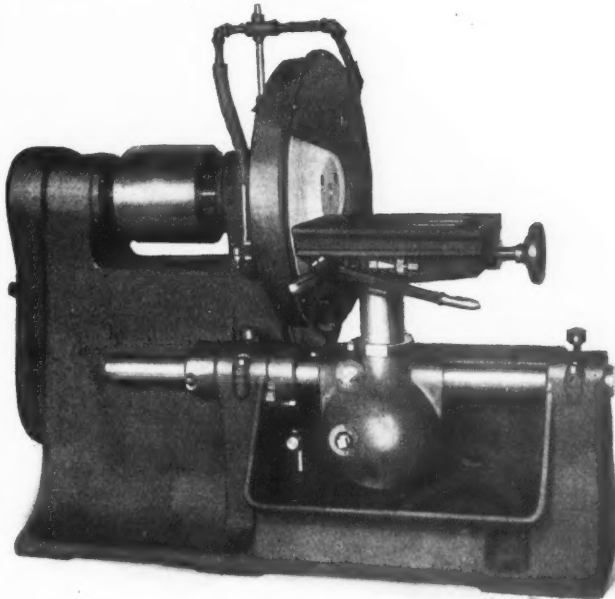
Front View of Gardner No. 50 Disk Grinder
